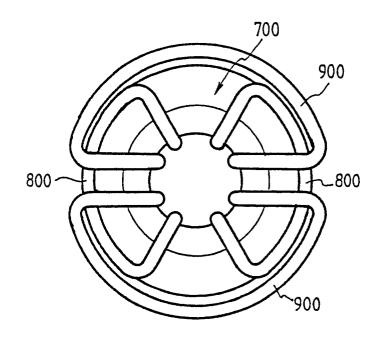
VIEW SHOWING DEFLECTING COILS WOUND AROUND CORE
